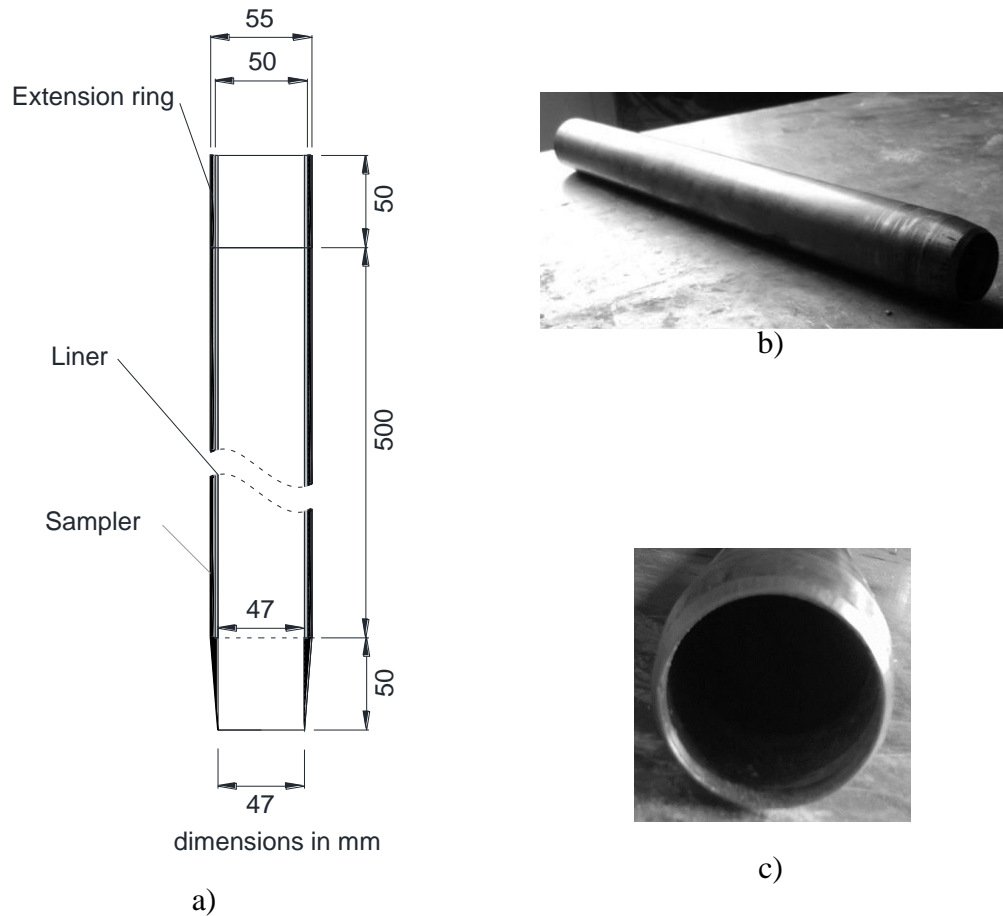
Sampler: a) lateral view and dimensions; b) global view; c) cutting head
